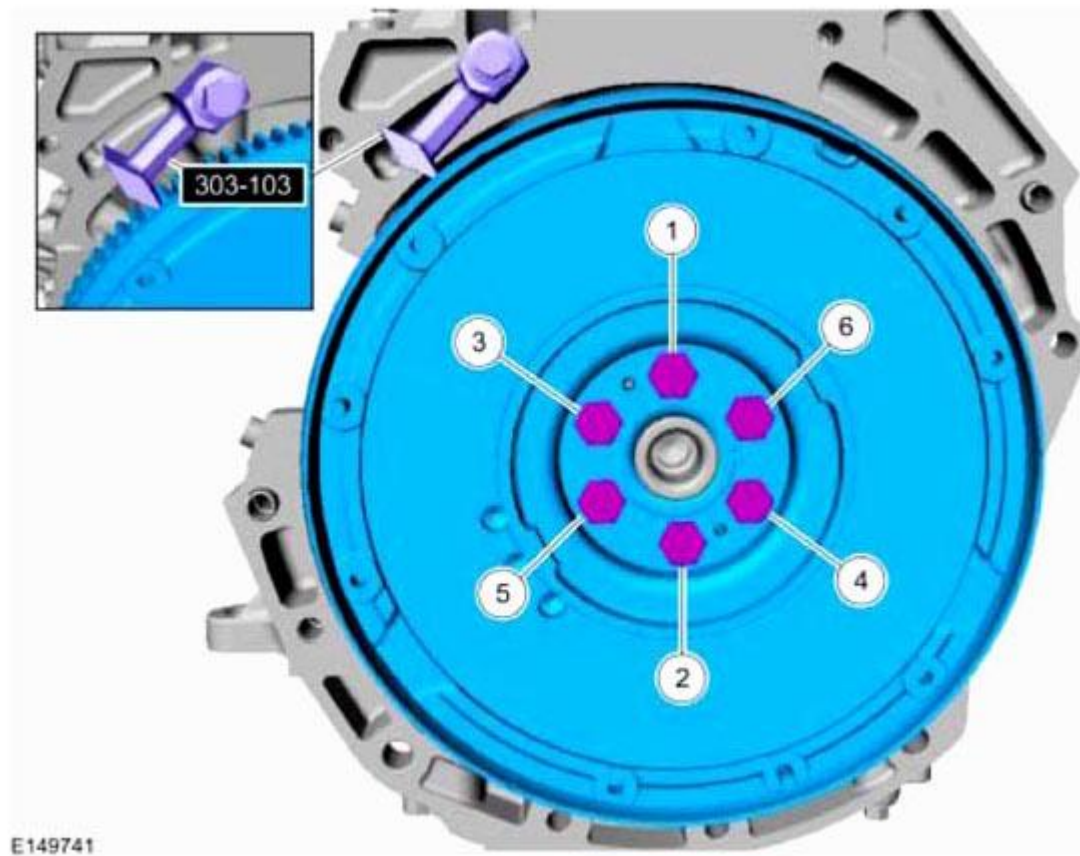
Identifying 303-103 Flywheel Holding Tool And Flywheel Bolts Tightening Sequence
